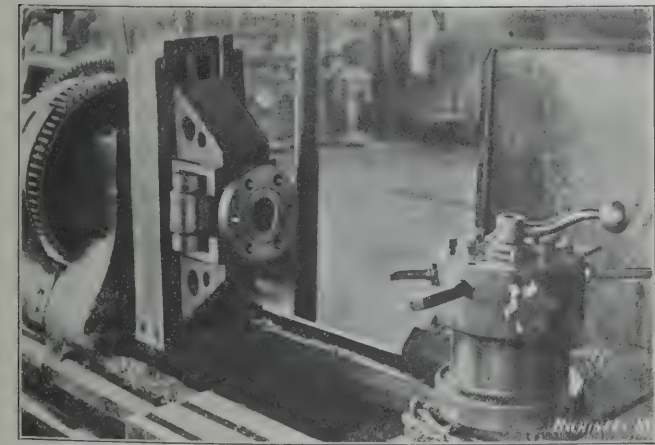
Lathe equipped with Chuck and Turret, both of which were made in the Shop
